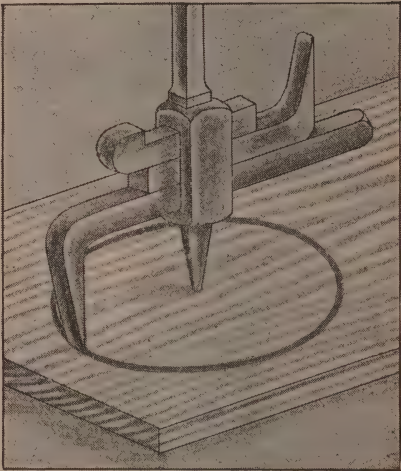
Cutting Circular Recess or Disc with Disc Cutter
